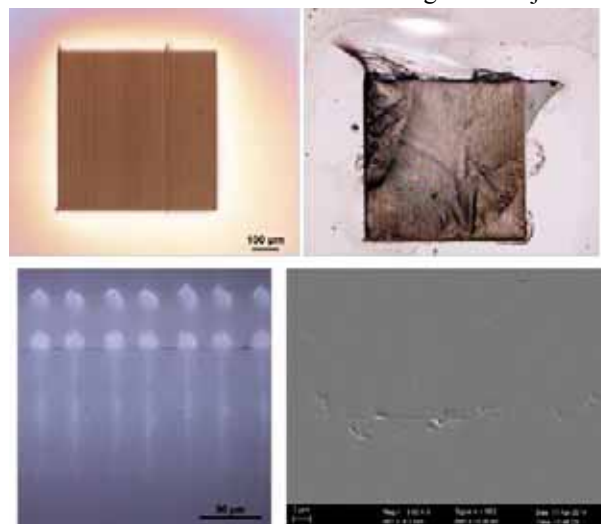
Femtosecond laser directly welding of quartz glass
